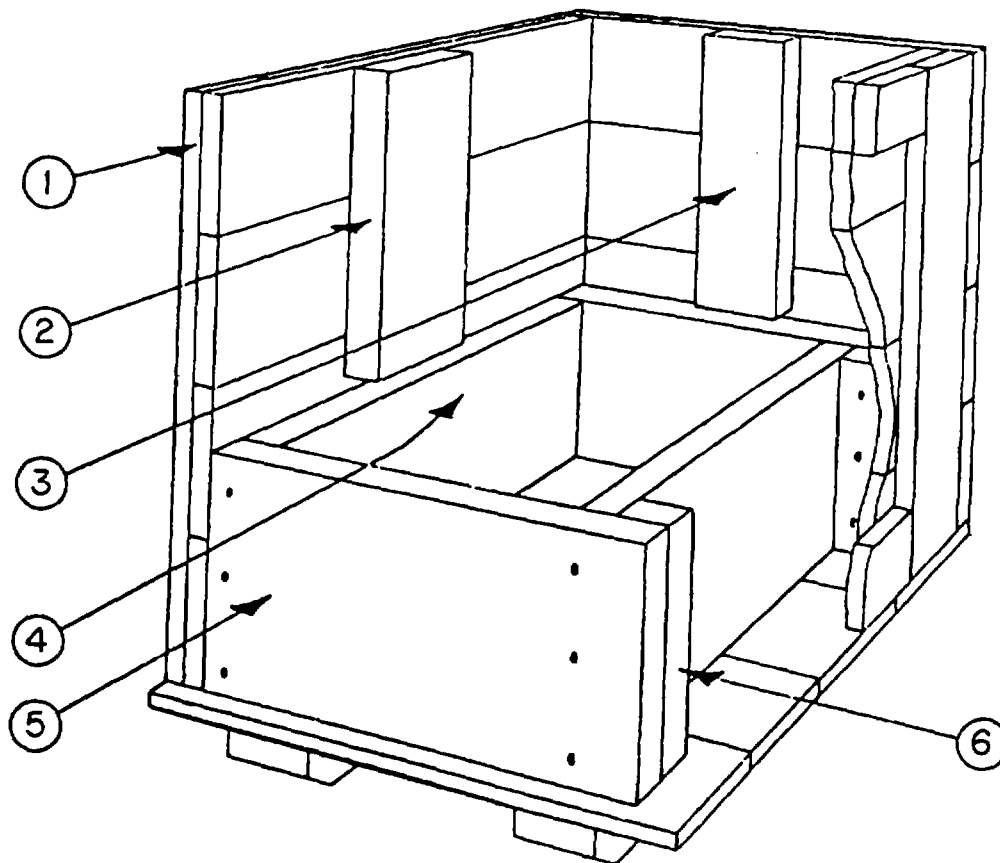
Loading, Blocking, Bracing, and Anchoring.
